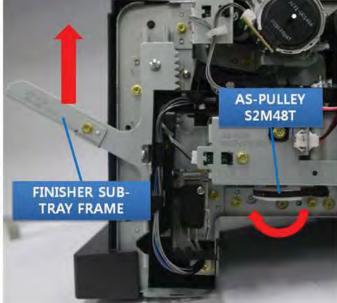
Remove the front jogger home sensor (1 of 15)
